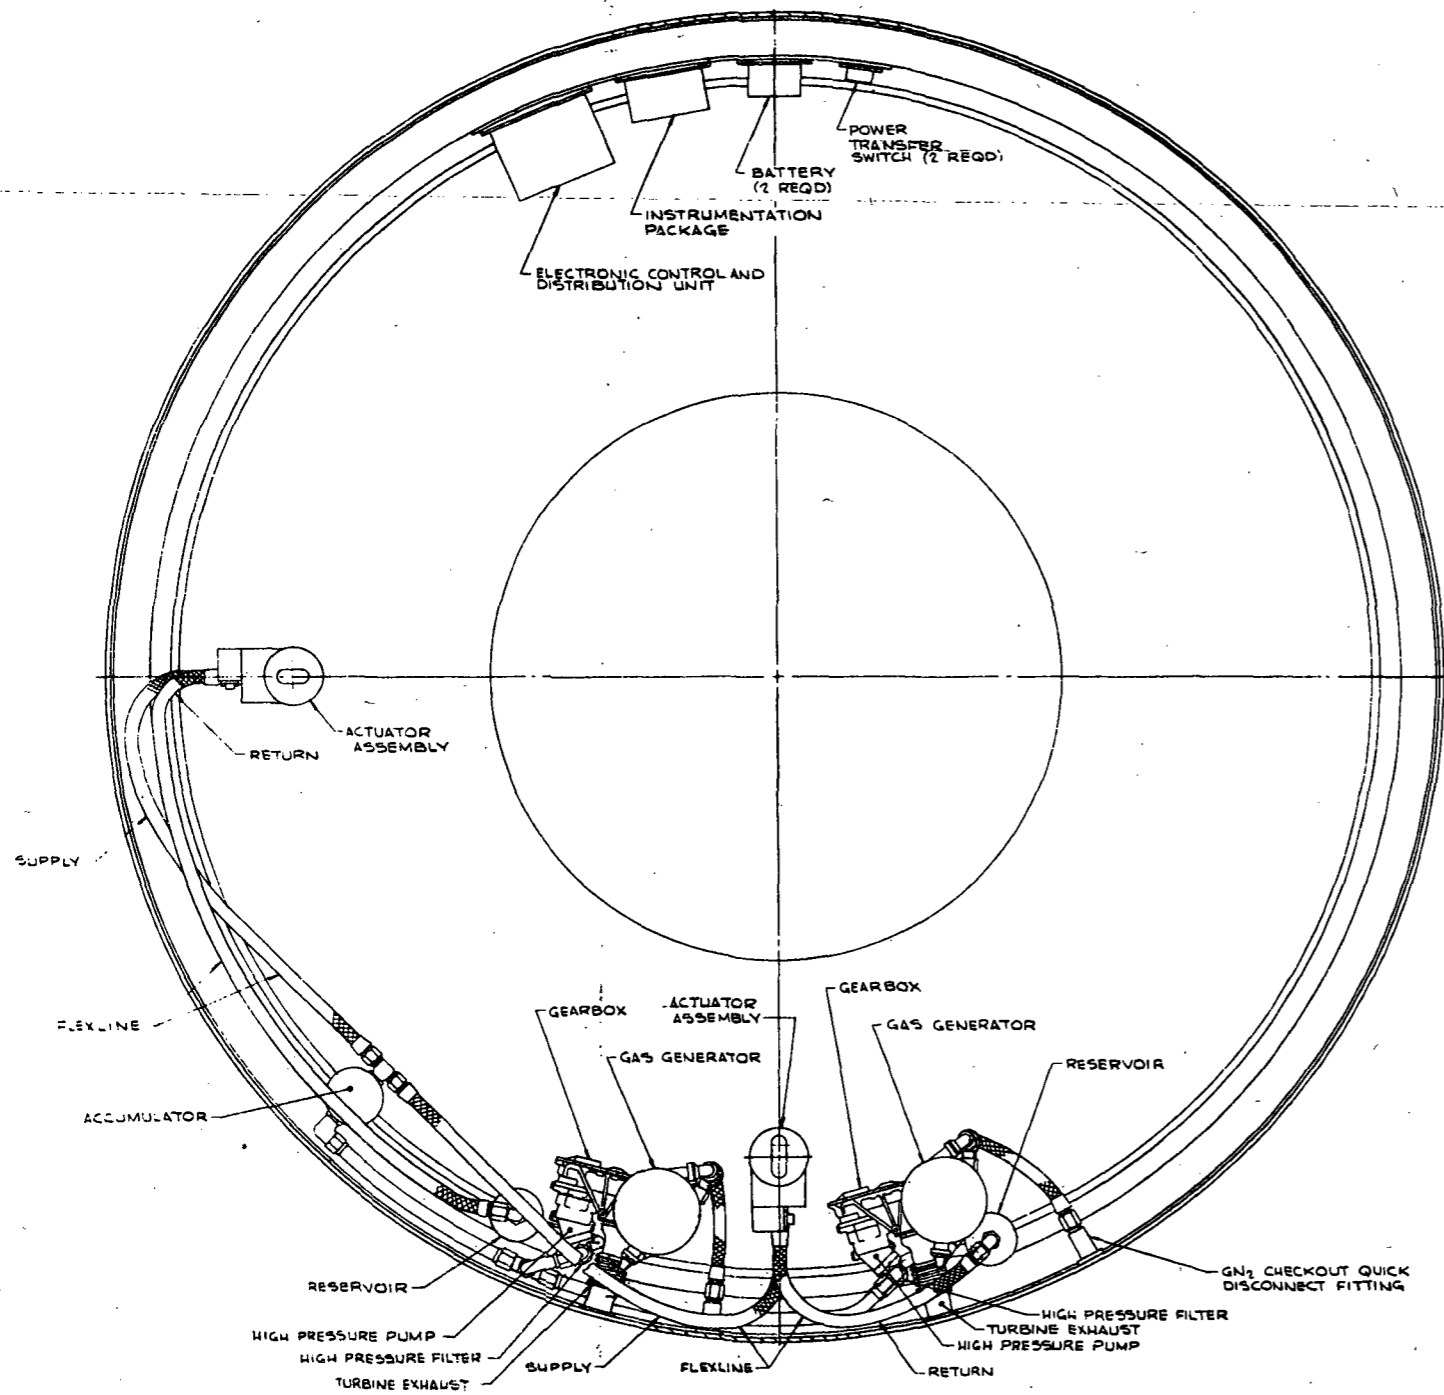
Installation of TECHROLL Seal Hydraulic Power Supply
